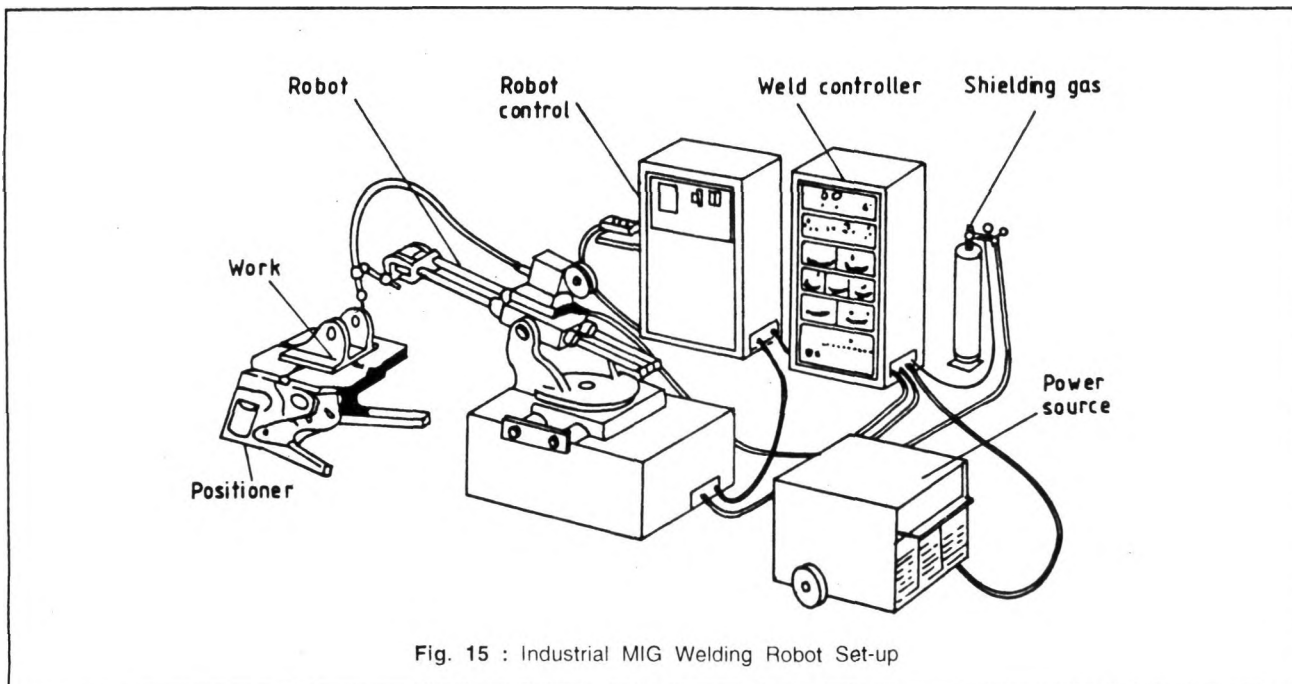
Industrial MIG Welding Robot Set-up
